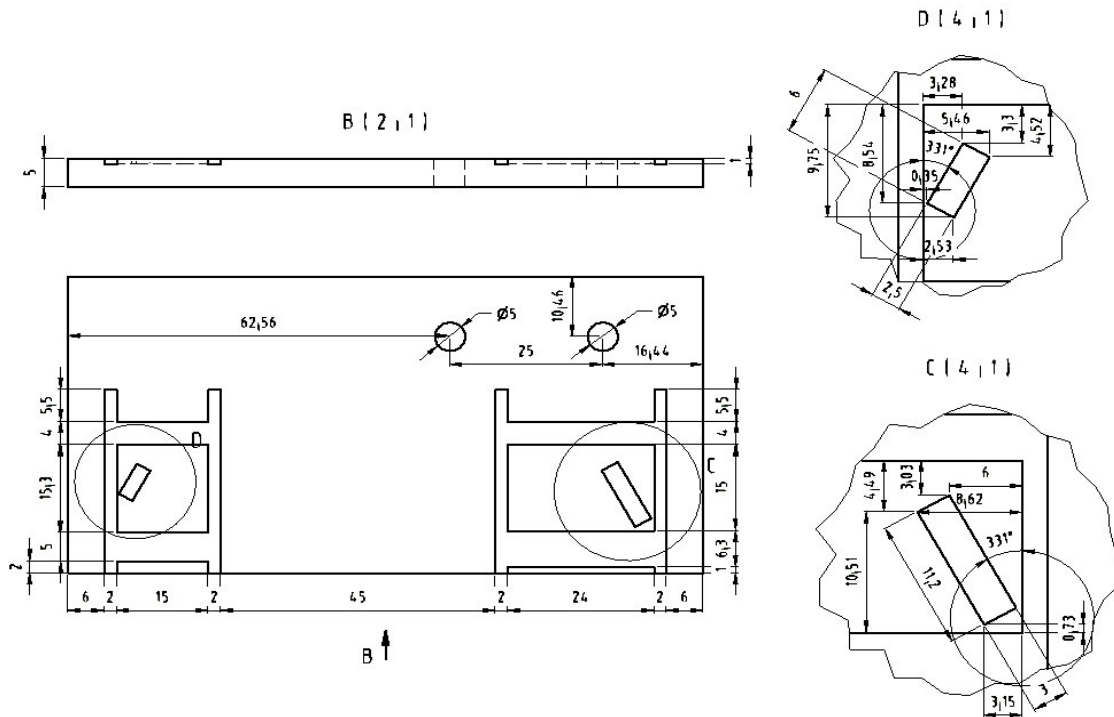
A sketch of the main refractometer, dimensions in mm.
